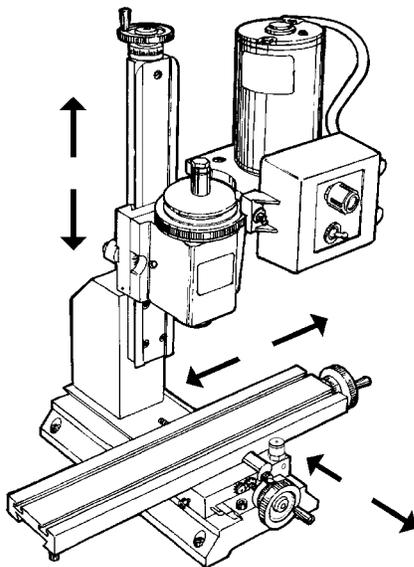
The axes of movement for milling on a standard 3-axis vertical milling machine.
